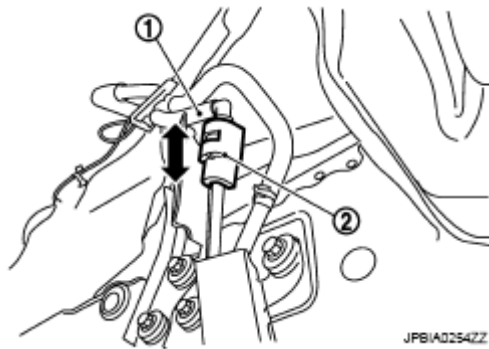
Disconnecting Fuel Feed Hose (With Damper) From Bracket Hose Clamp
